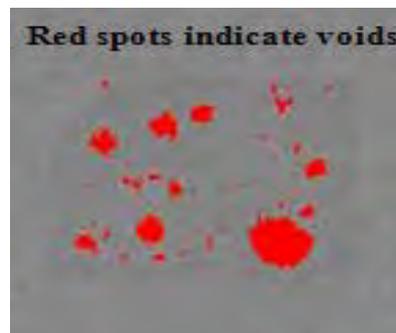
X-ray image showing voids in solder die-attach. Void enclosures in the solder layer are visible as red spots
